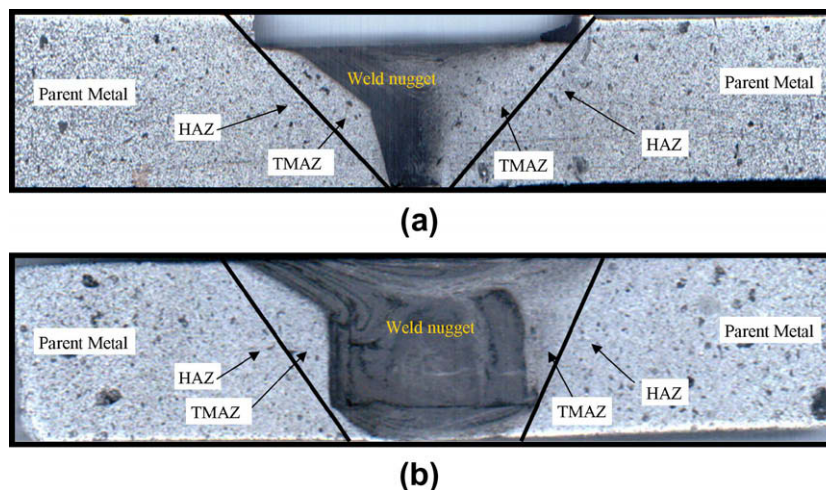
Macrostructure of the friction stir welded Al–TiB₂ MMC using: (a) tapered hexagonal pin profiled tool and (b) straight square pin profiled tool.
